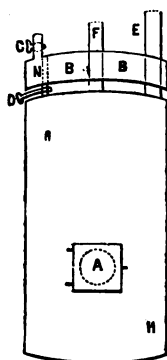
Read's Multi-Tubular Boiler, 1788.
